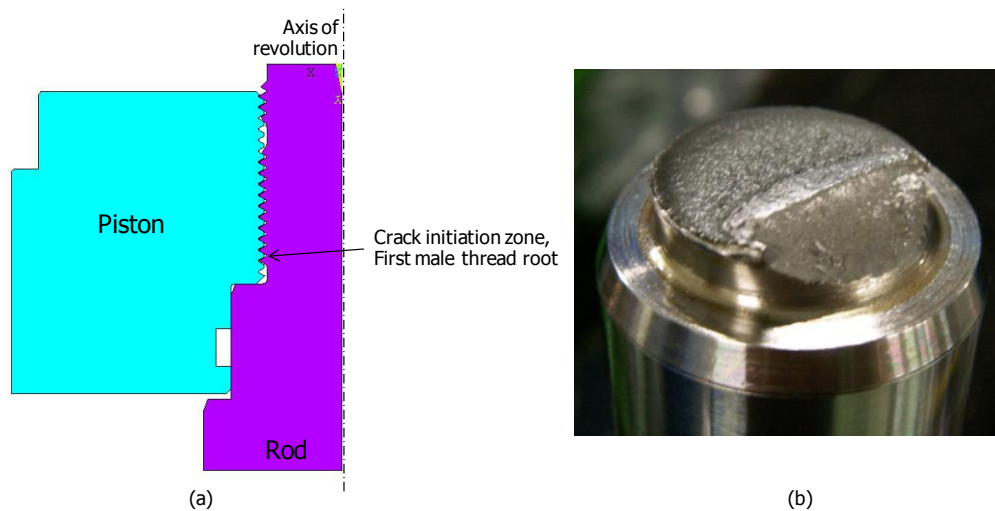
(a) The 2D axisymmetric geometry studied (b) A typical fatigue failure surface, after crack initiation at the root of the first load-bearing thread of the piston rod.
